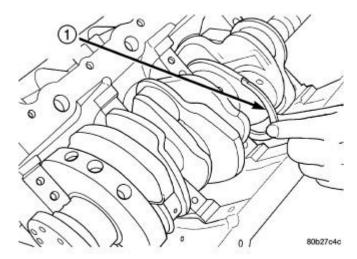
Thrust Washer Installation Courtesy of CHRYSLER LLC
